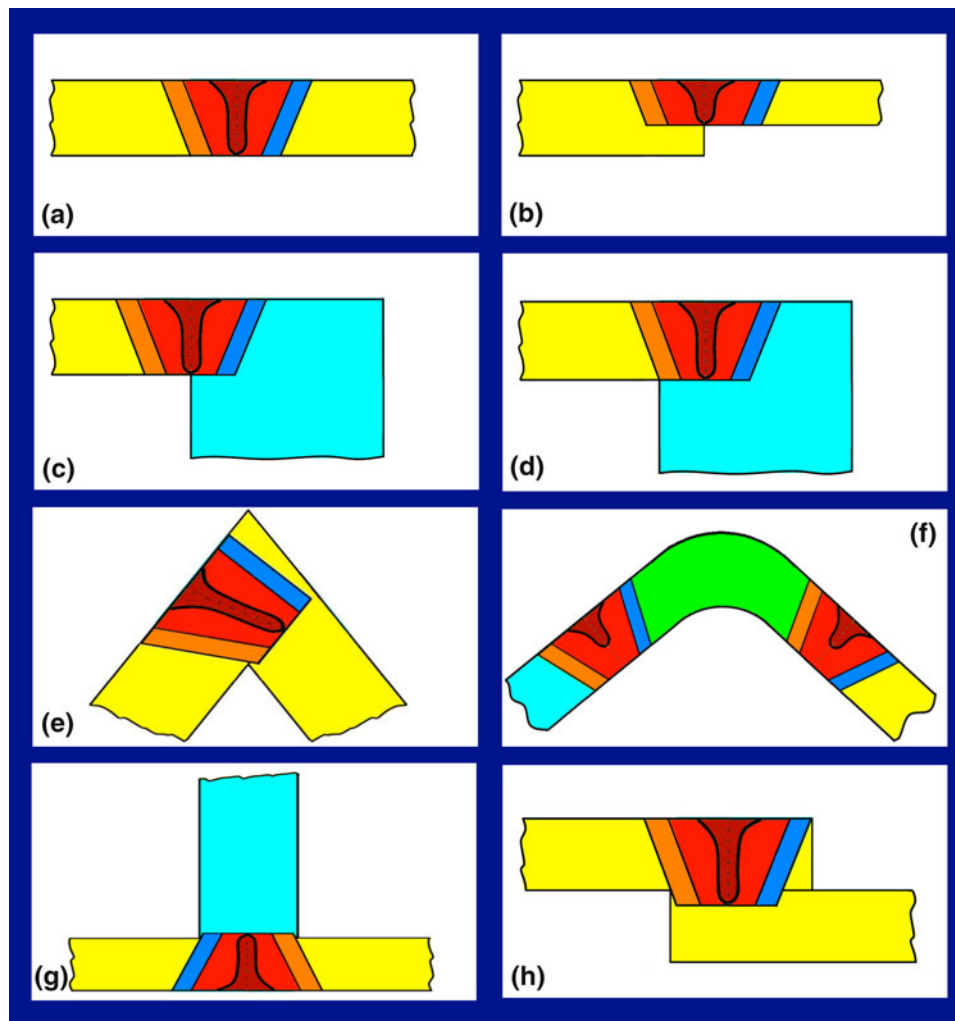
Typical joint/weld geometries/designs fabricated using the FSW process: (a) flat-butt joint; (b) unequal thickness flat-butt joint; (c) 90° corner-butt joint; (d) 90° corner rabbeted joint; (e) angle joint; (f) transition weld joint; (g) T-joint; and (h) lap joint
